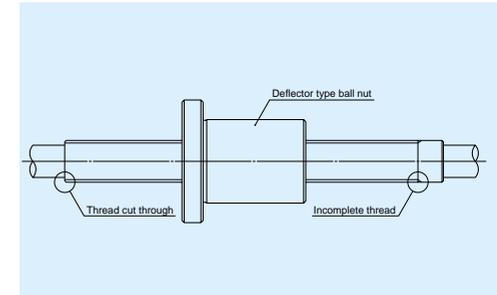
Shaft end of a deflector recirculation system ball screw
